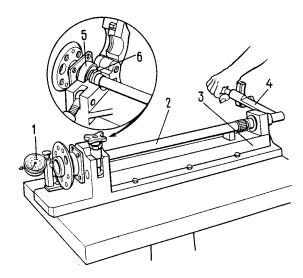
Checking Fit of Axle Shaft Bearing Lockring:
